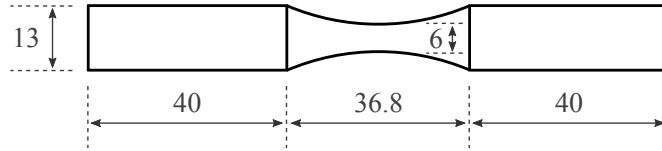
Dimensions (in mm) of the fatigue specimens used in this work.
